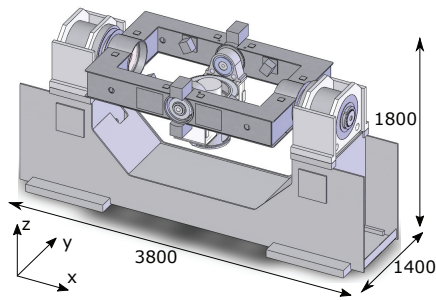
Reference aluminum testing machine. Dimensions in [mm].
